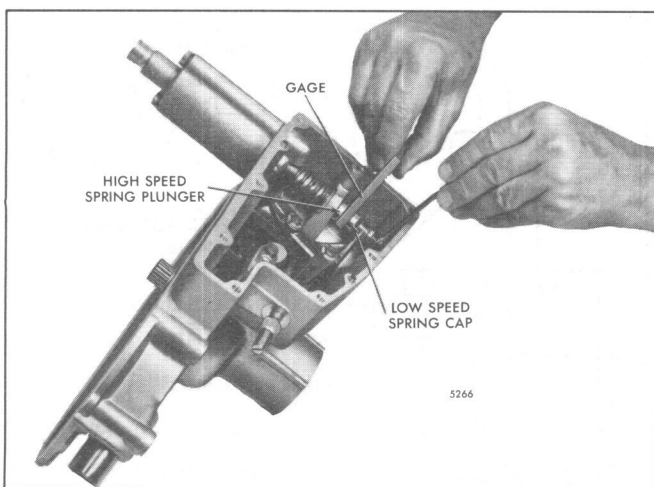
Adjusting Governor Gap (Single-Weight Governor) with Feeler Gage J 23478
